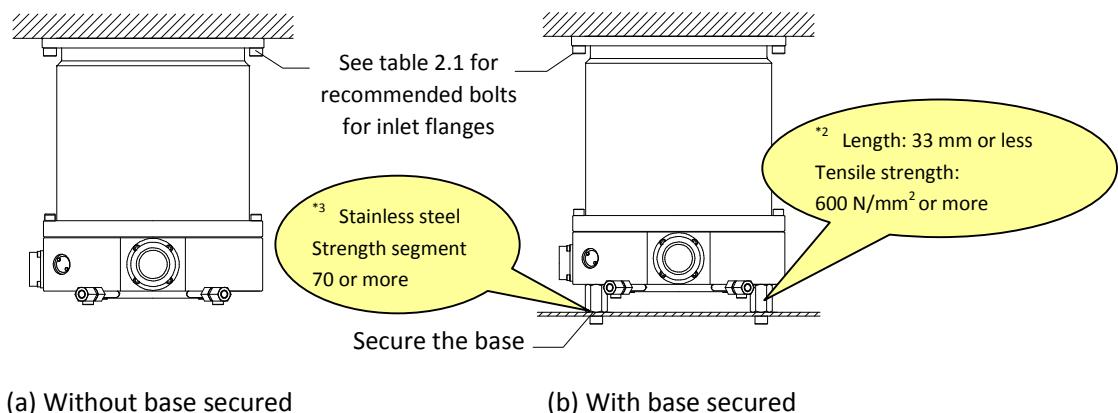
Methods of securing the STP pump using inlet flange holes
